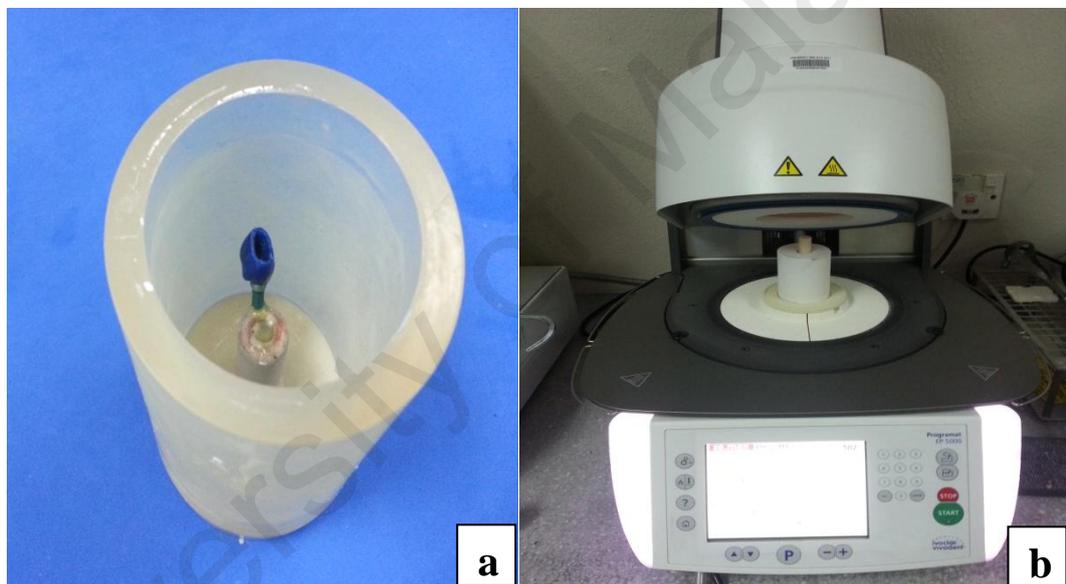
a) Spruing the wax pattern into the investment mould, b) Heat pressing of IPS e.Max Press ingot
